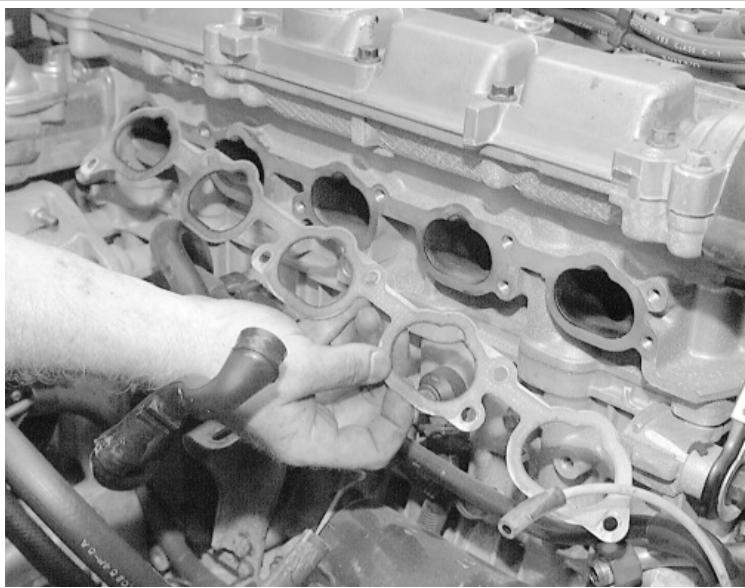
Remove the old intake gasket from the cylinder head and thoroughly clean the mating surfaces
